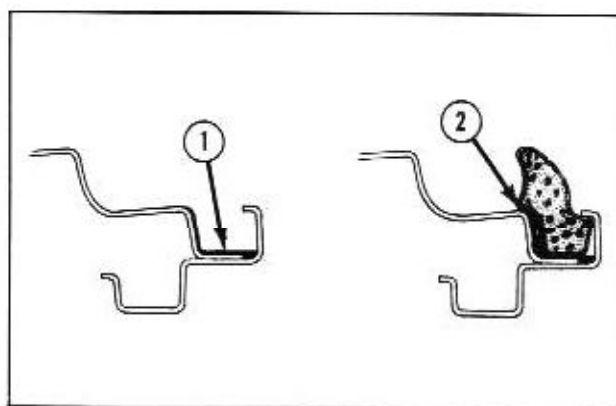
Cross Section View of Rear Compartment Gutter & Weatherstrip
